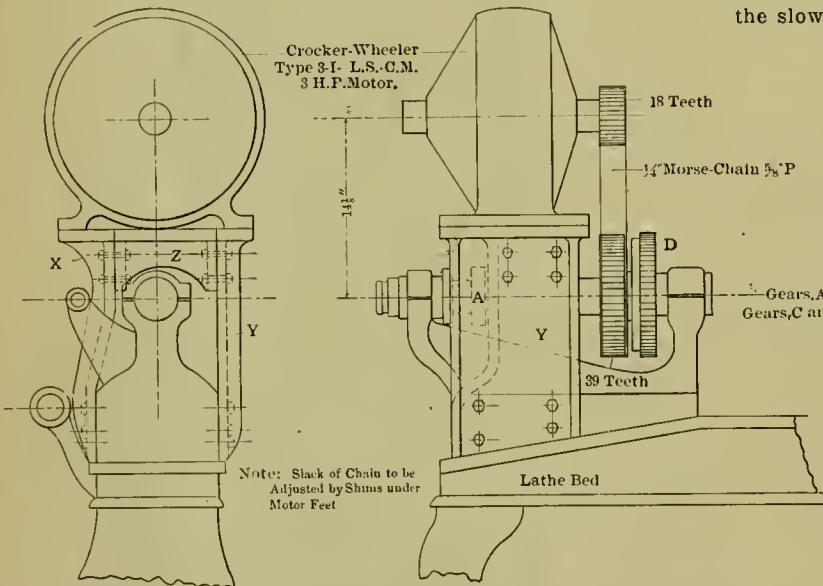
DETAILS OF THE ARRANGEMENT OF MOTOR DRIVING FOR THE 18-INCH TURRET LATHE FOR BRASS WORK.
